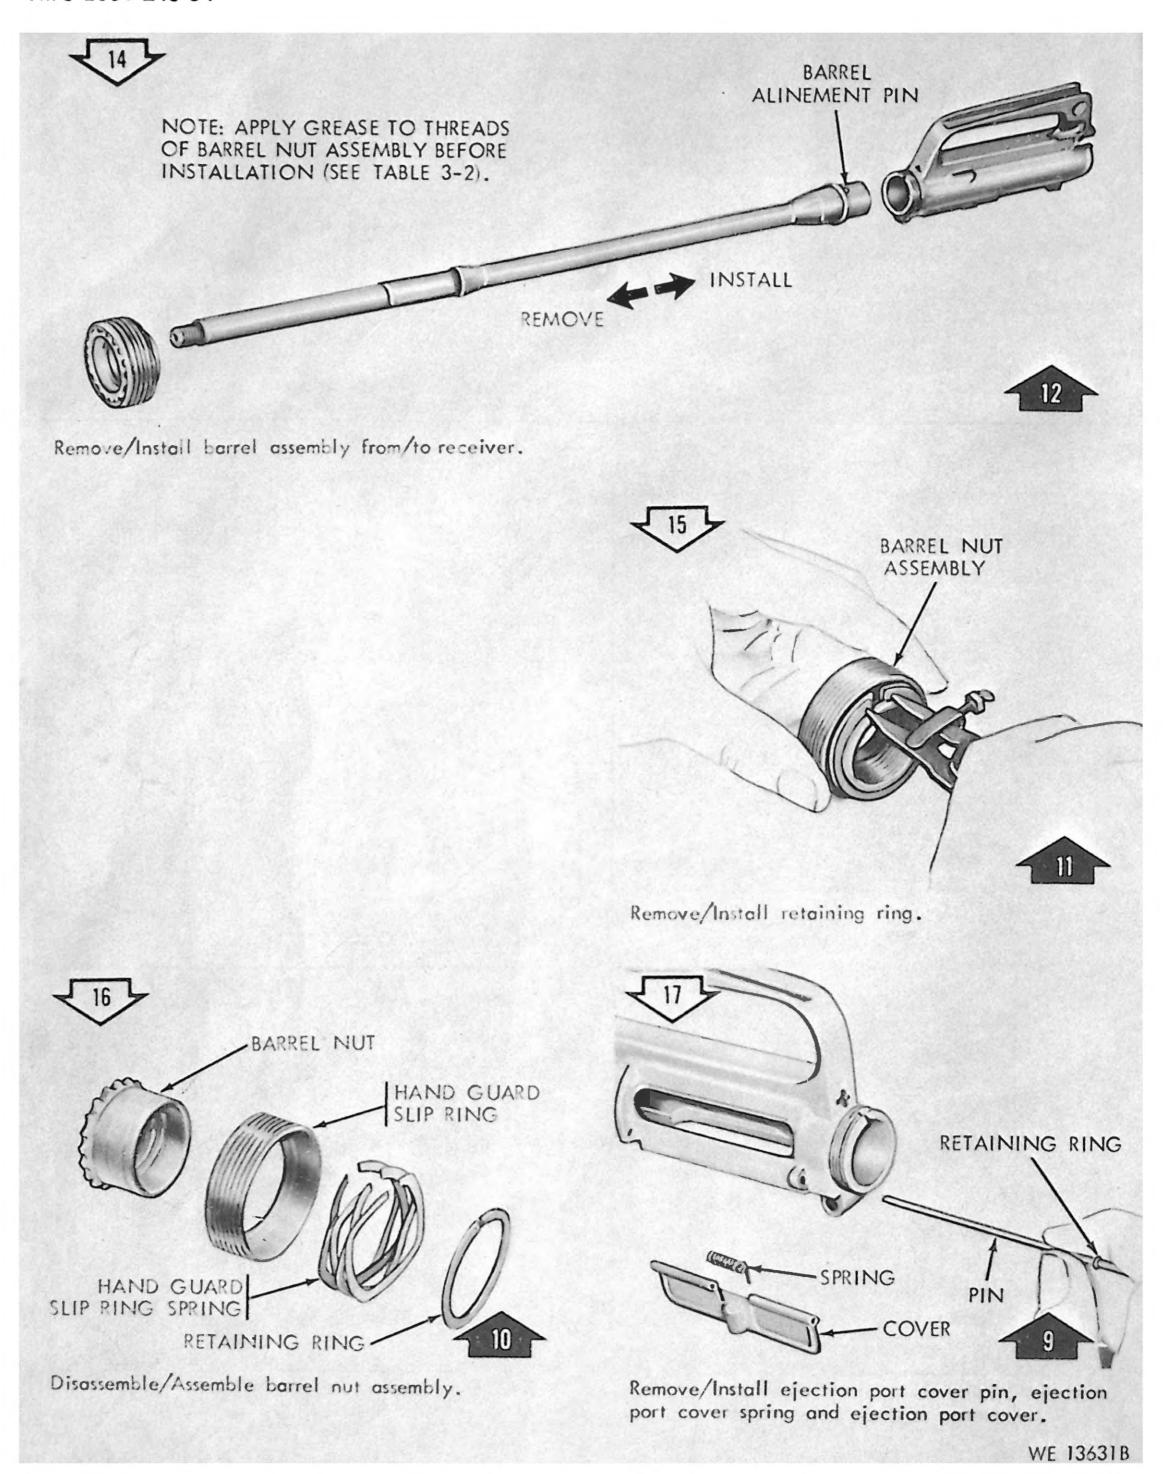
Disassembly/assembly of upper receiver group. (4 of 6)
